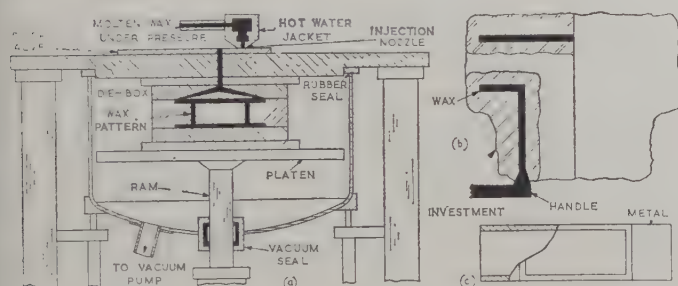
Lost-wax investment casting; (a) vacuum wax-injection machine, (b) wax pattern with refractory investment, (c) finished cast article—an *H* plane, T junction.
